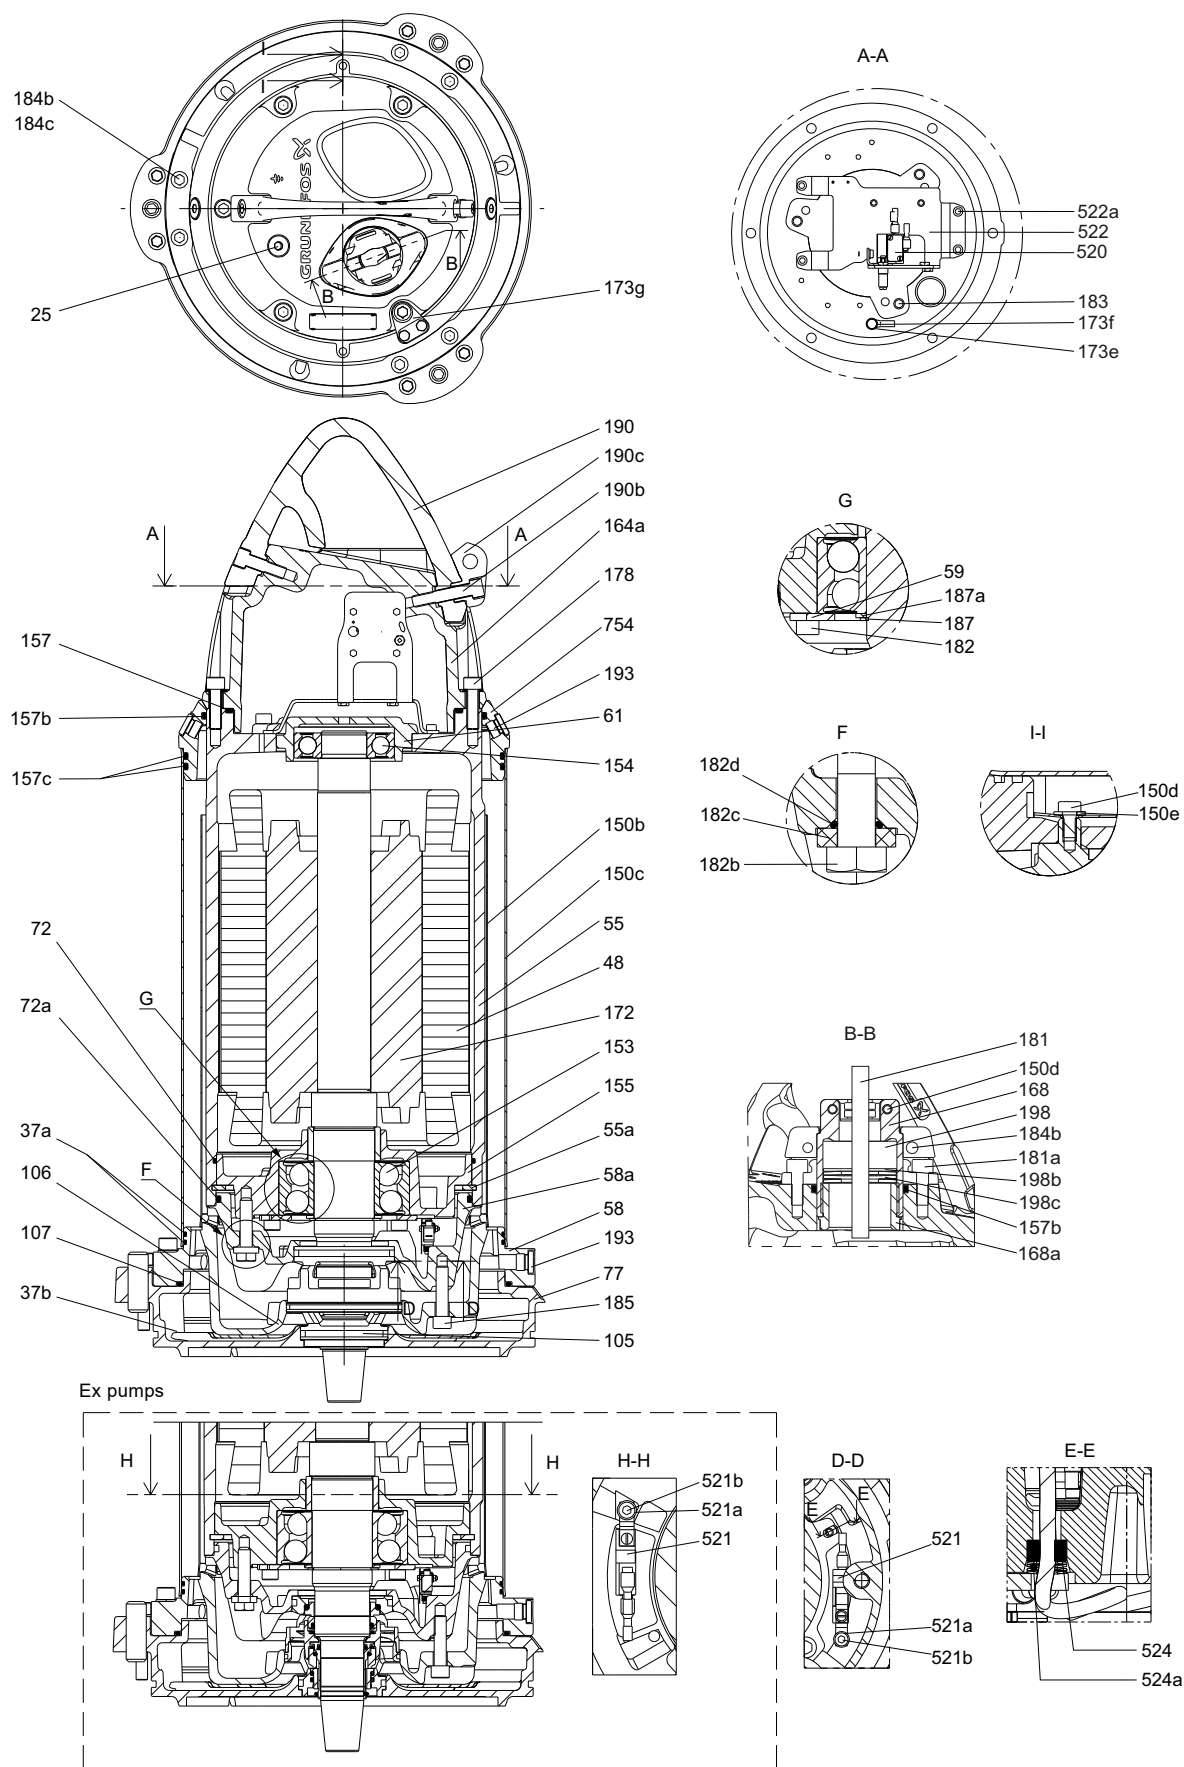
SE pump, with cooling jacket (6-pole motors) (H-H: Explosion proof version)
